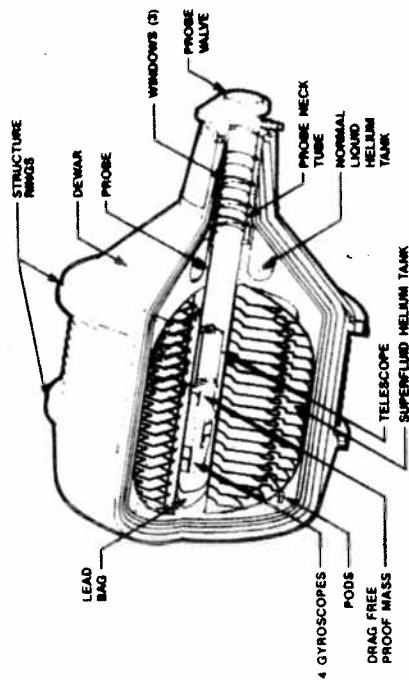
Science Instrument Assembly Mounted Inside the Probe and Dewar (Early Version)
